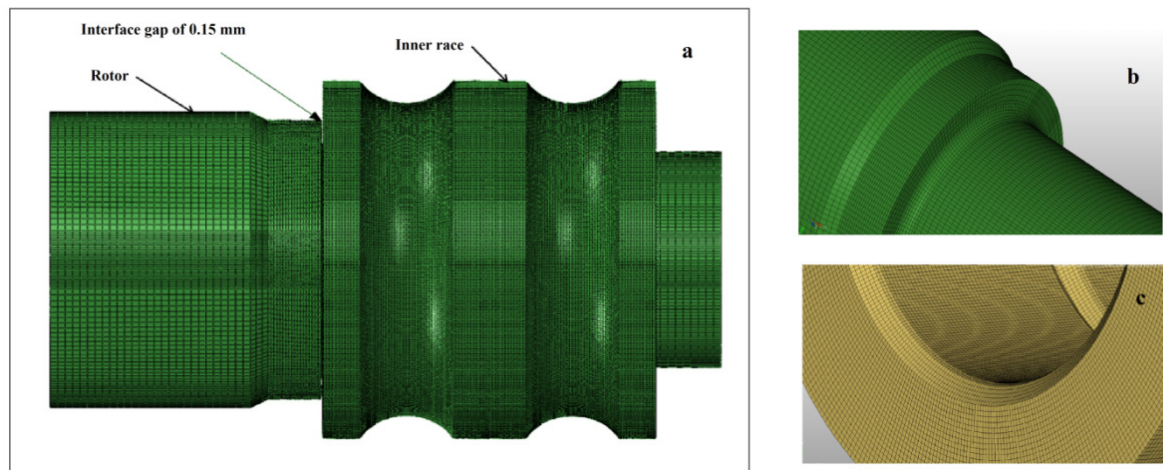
Interface gap of 0.15 mm (a) caused by the interface mismatch of shaft shoulder radius R1 (b) and the $0.8 \times 45^\circ$ chamfer of the inner race (c)
